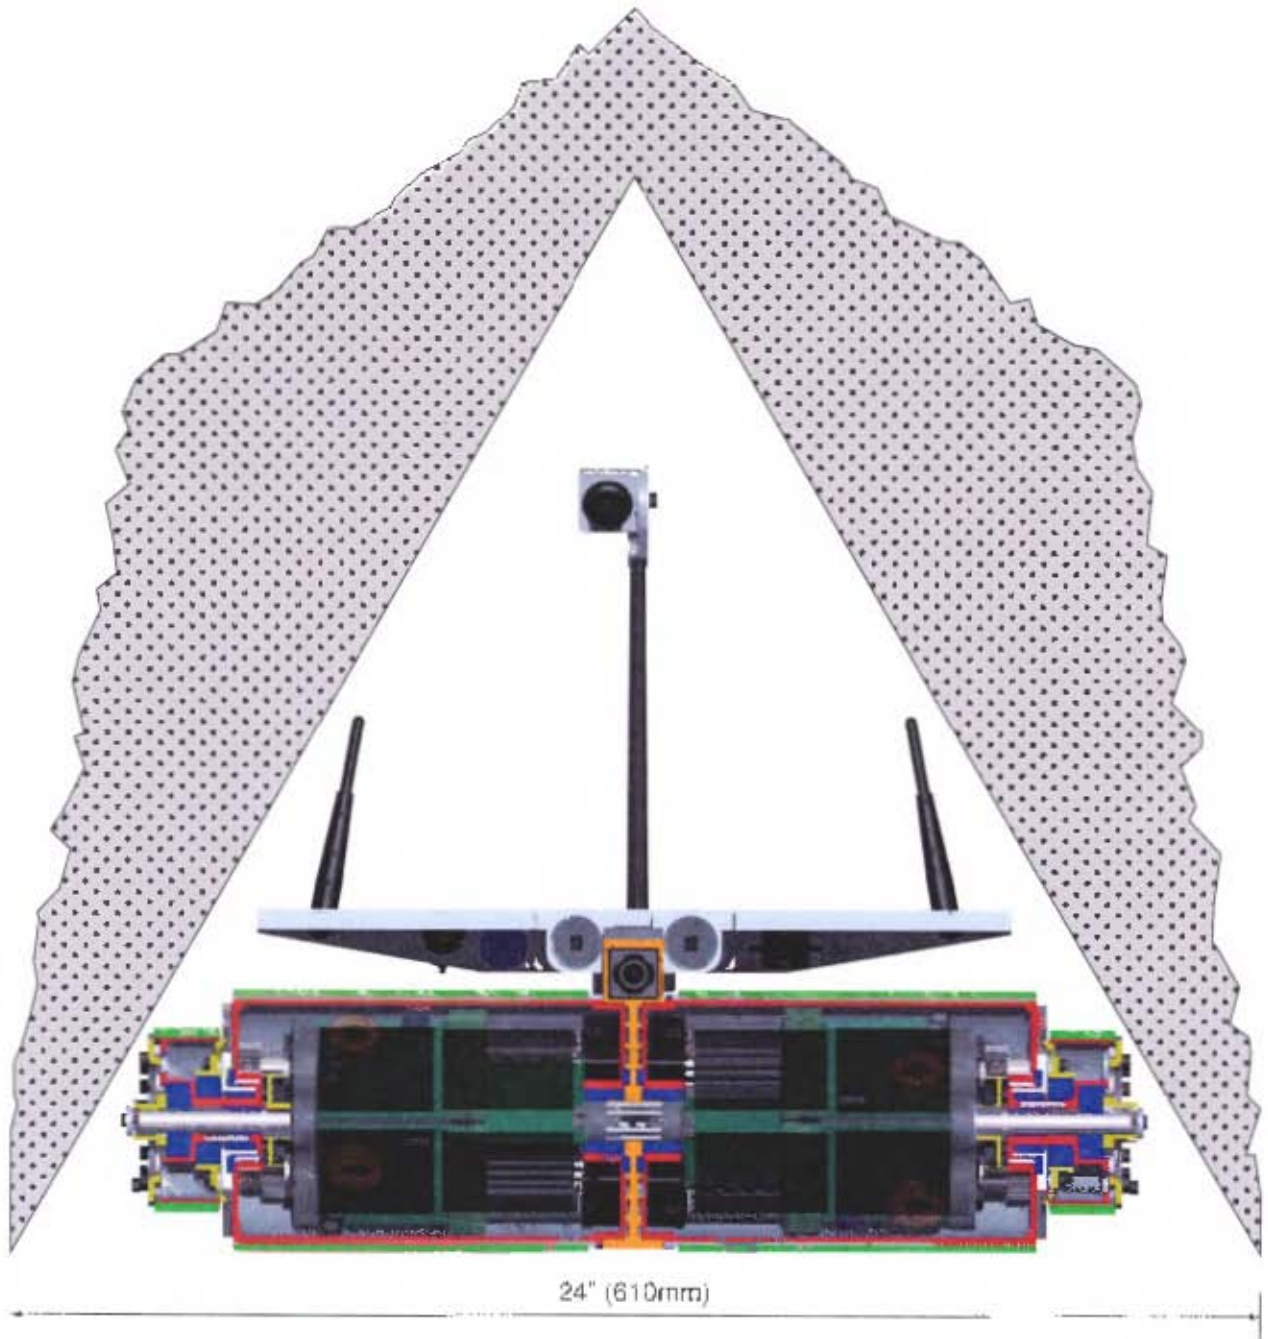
A cross-section through the drive pulleys of the platform showing the drive motors enclosed within the drive pulleys, and the space constraints resulting from having to fit through an entry triangle.
